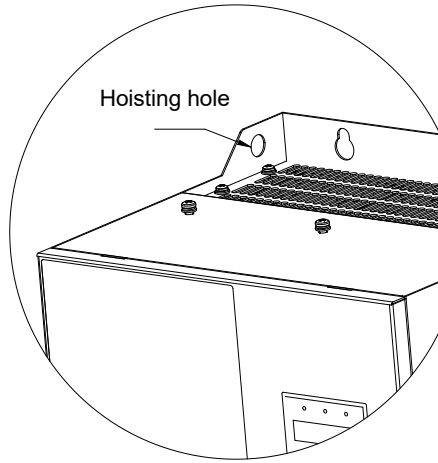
Hoisting Diagram of Sheet Metal Structure
